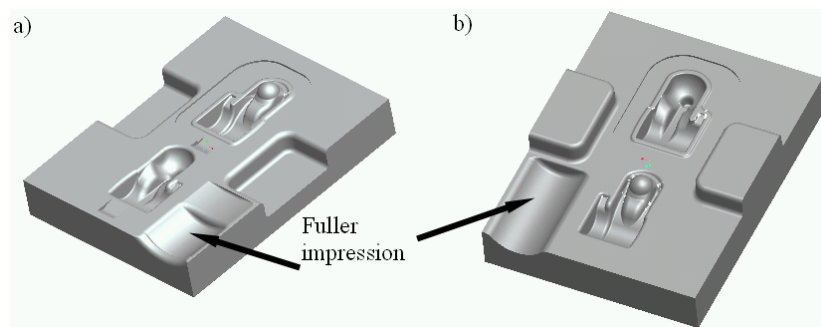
View of upper (a) and lower (b) industrial dies with fuller, blocker and finisher impressions (version I)
